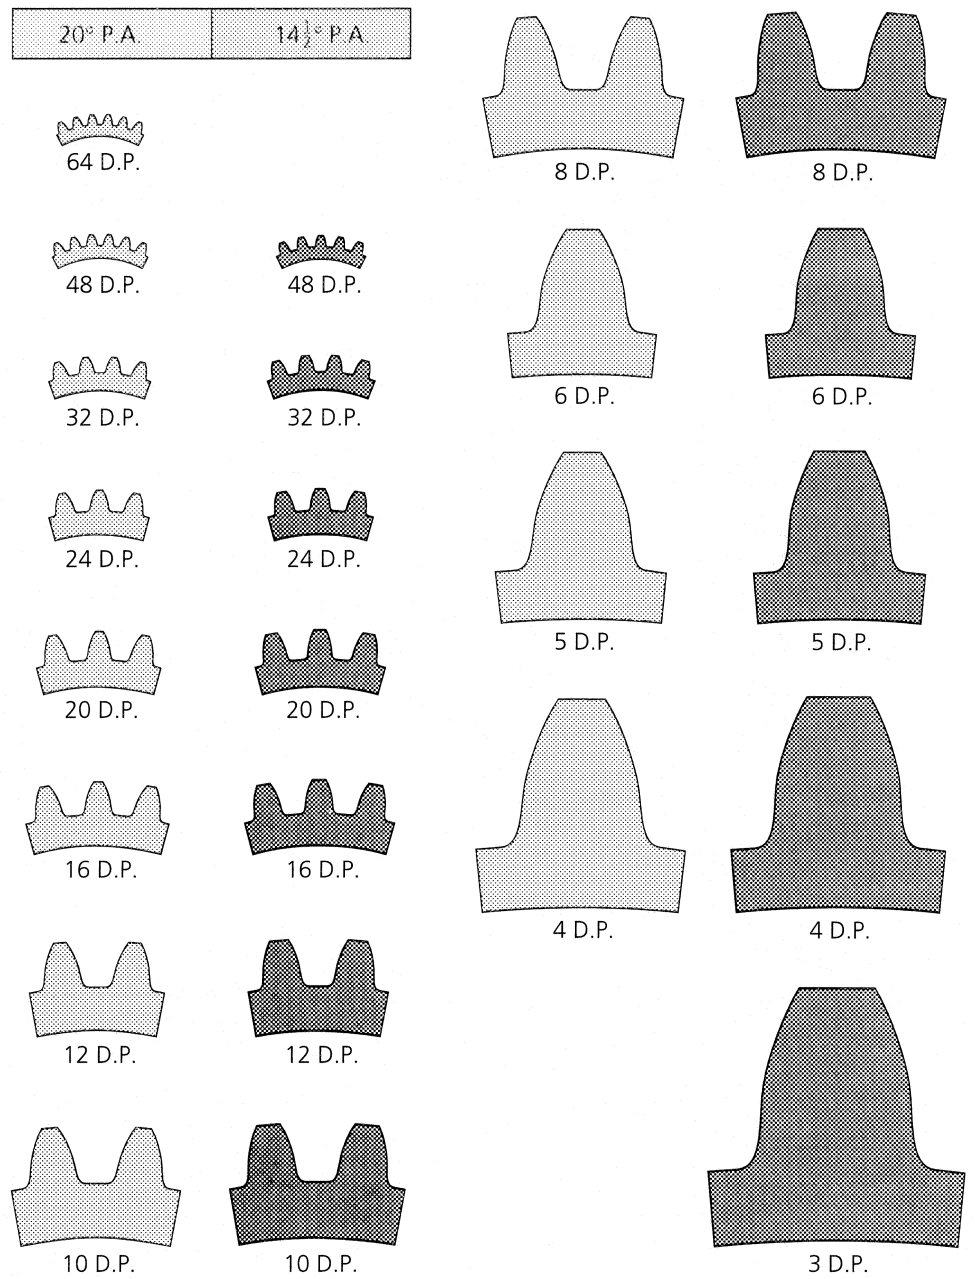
Spur Gear Teeth Outlines (shown full size)
